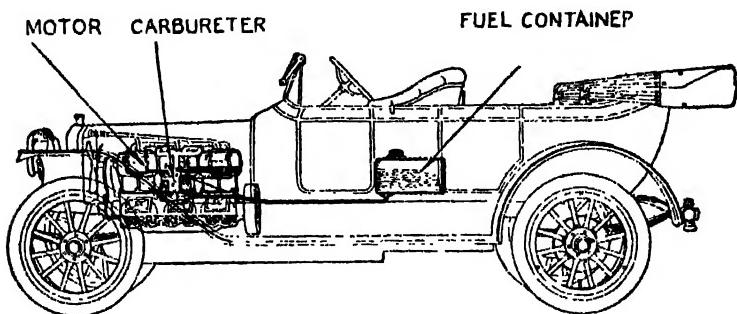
Fuel System in which Gasoline Tank is carried Under Front Seat.
